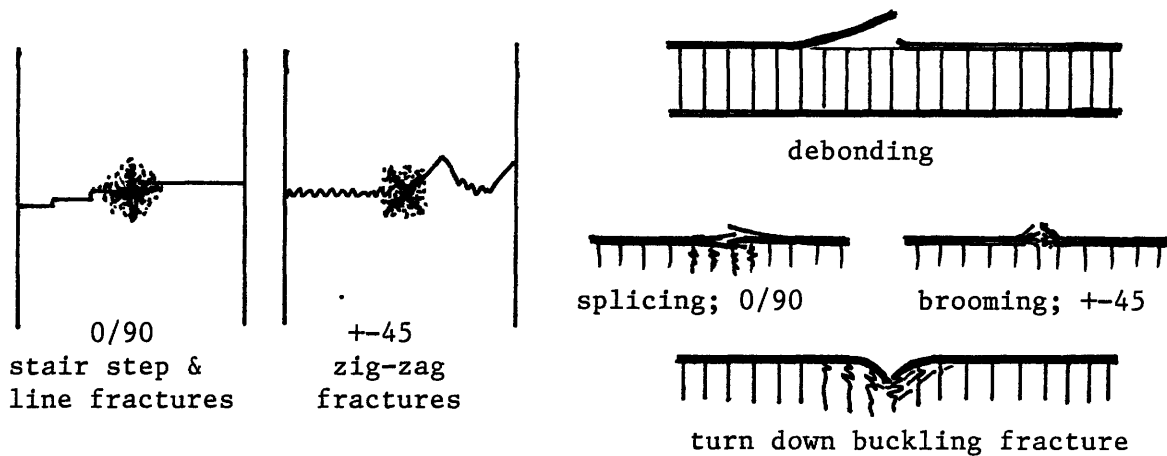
Compressive Fracture Modes for Damaged Face Sheet
